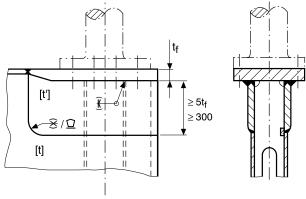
Shaft bracket without integrally cast welding flanges
